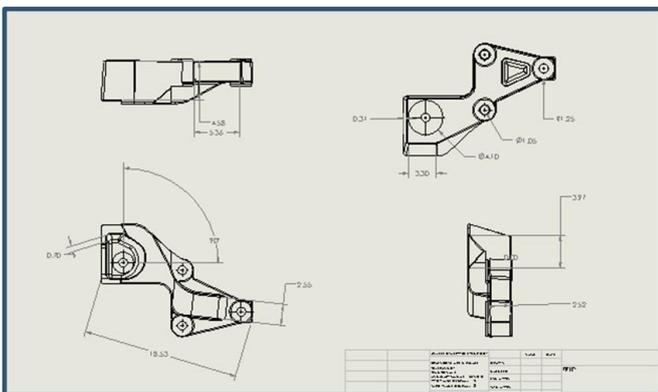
PEUGEOT 206 GTI 180 Engine Mount Bracket Dimensions Sheet
